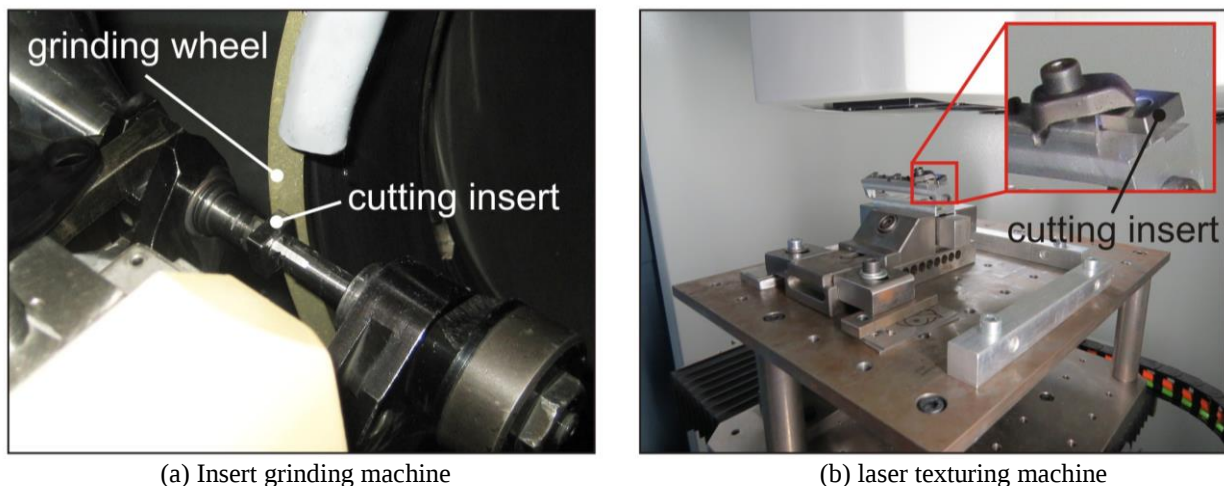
Equipment employed for cutting edge preparation: (a) Insert grinding machine and (b) laser texturing machine
